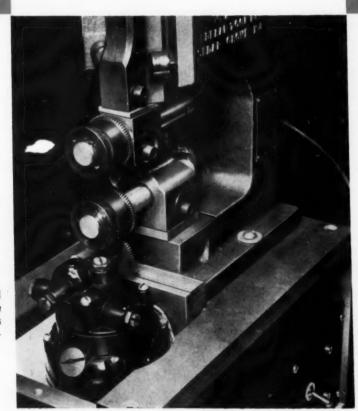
Spot welder converted to seam welding is a machine tooled for joining bellows seams with "home-built" electrode wheels and a drive.
